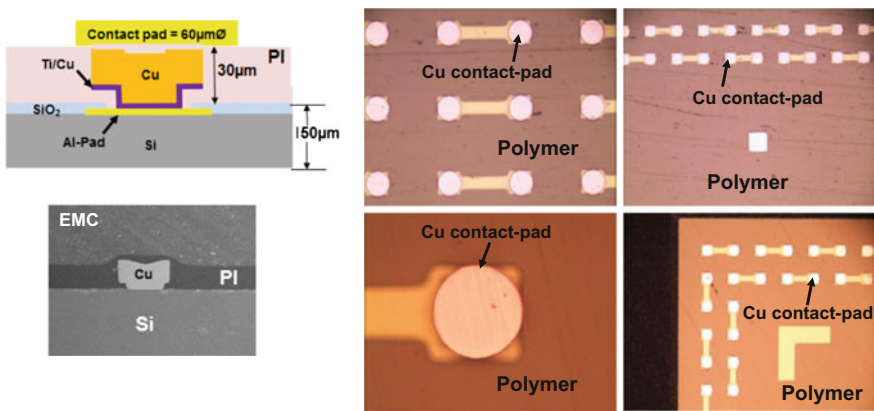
(L) Test chip with the tall polymer (~30 μm) to cover the Cu contact pad and chip surface. (R) After backgrinding the EMC to expose the Cu contact pads (Cu revealing)
